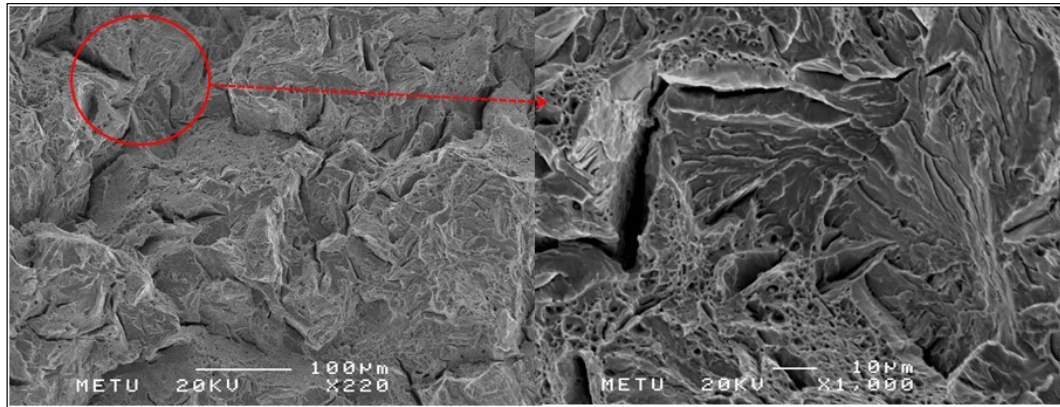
SEM micrograph showing dimple/voids and cleavages/facets view of fracture surface of group-2 tensile test specimen. (SP-3)
